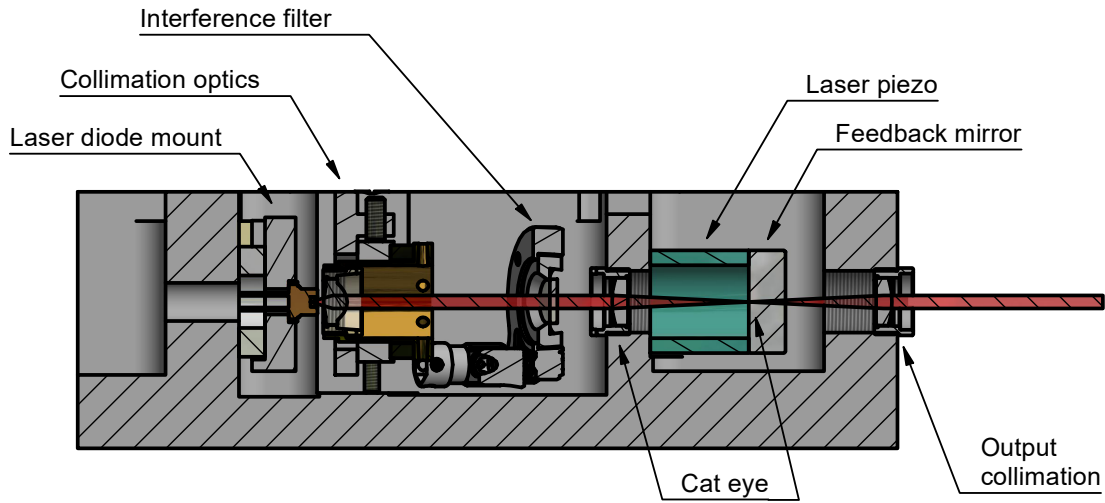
Cross section of the external-cavity diode laser used in this work. The depicted laser head is placed in an enclosure that contains the laser backplane and a thermo-electric cooler.
